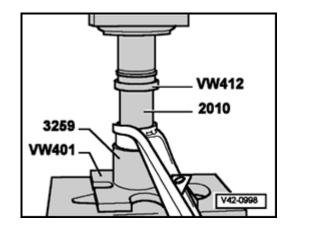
Pressing bonded rubber bushing in and out of lower control arm
